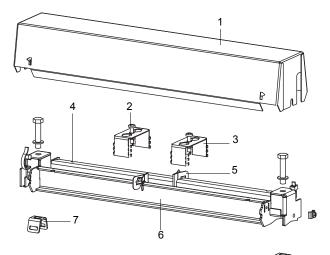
Dismounting of the transducer mounting fixture Variofix C
